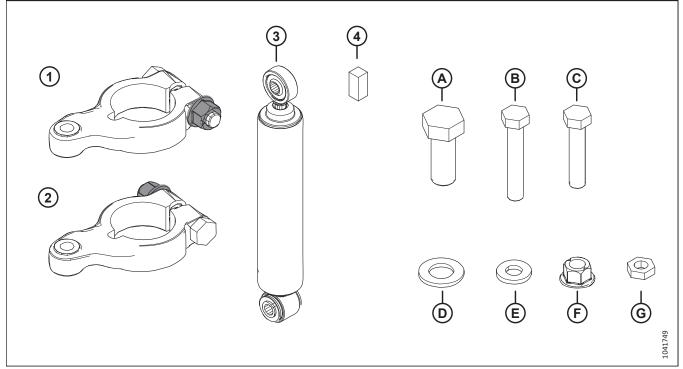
Walking Beam Parts Supplied in Tool Box
